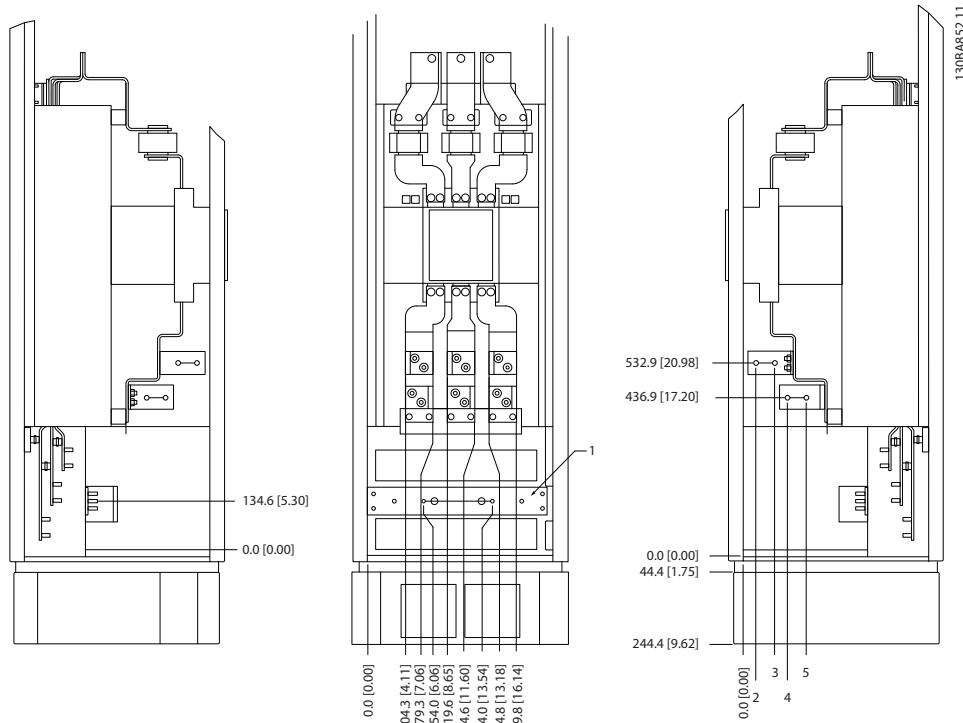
Terminal Locations - Rectifier (Left Side, Front and Right Side View). The Connector Plate is 42 mm (1.65 in) below .0 level.
